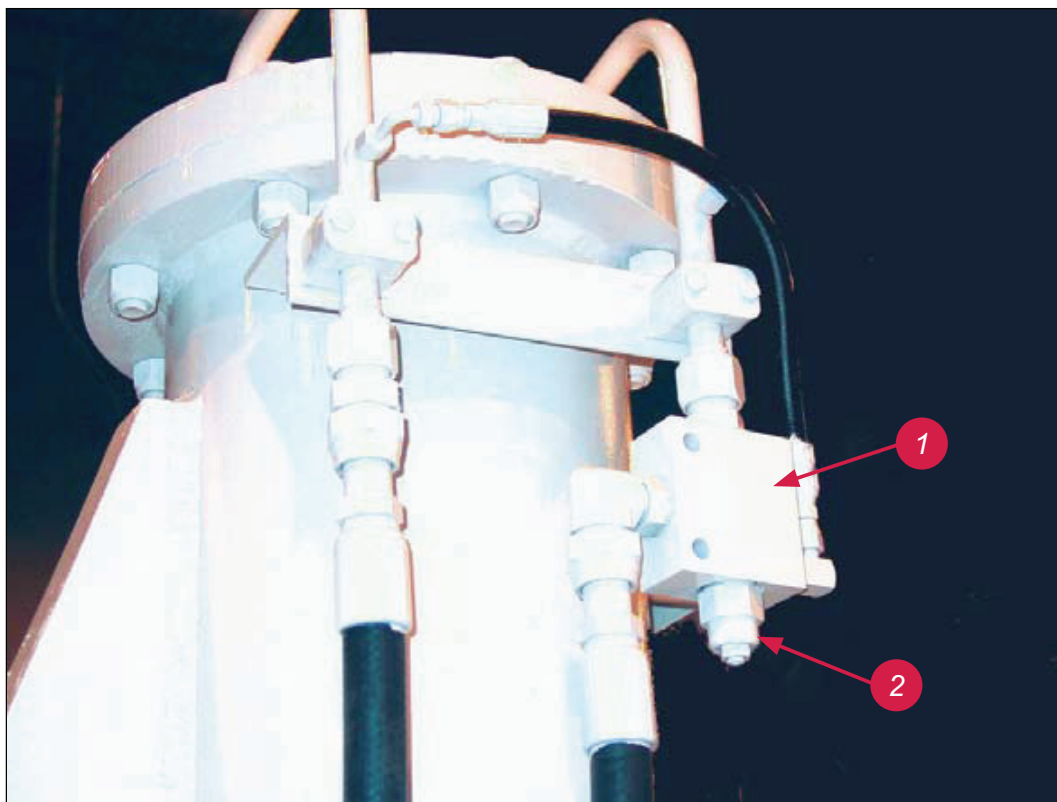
Jack Counterbalance Valve (1 per jack)
